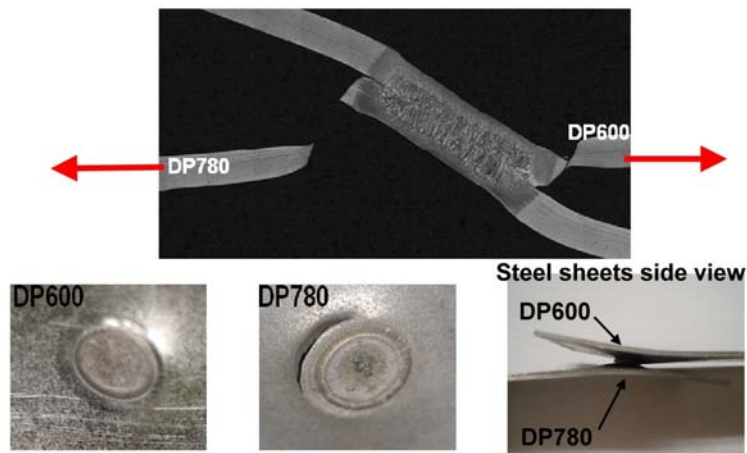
Cross-section of DP600_B-DP780_B partial lap-shear tensile test at 2.4 mm displacement of the crosshead just after final fracture.
